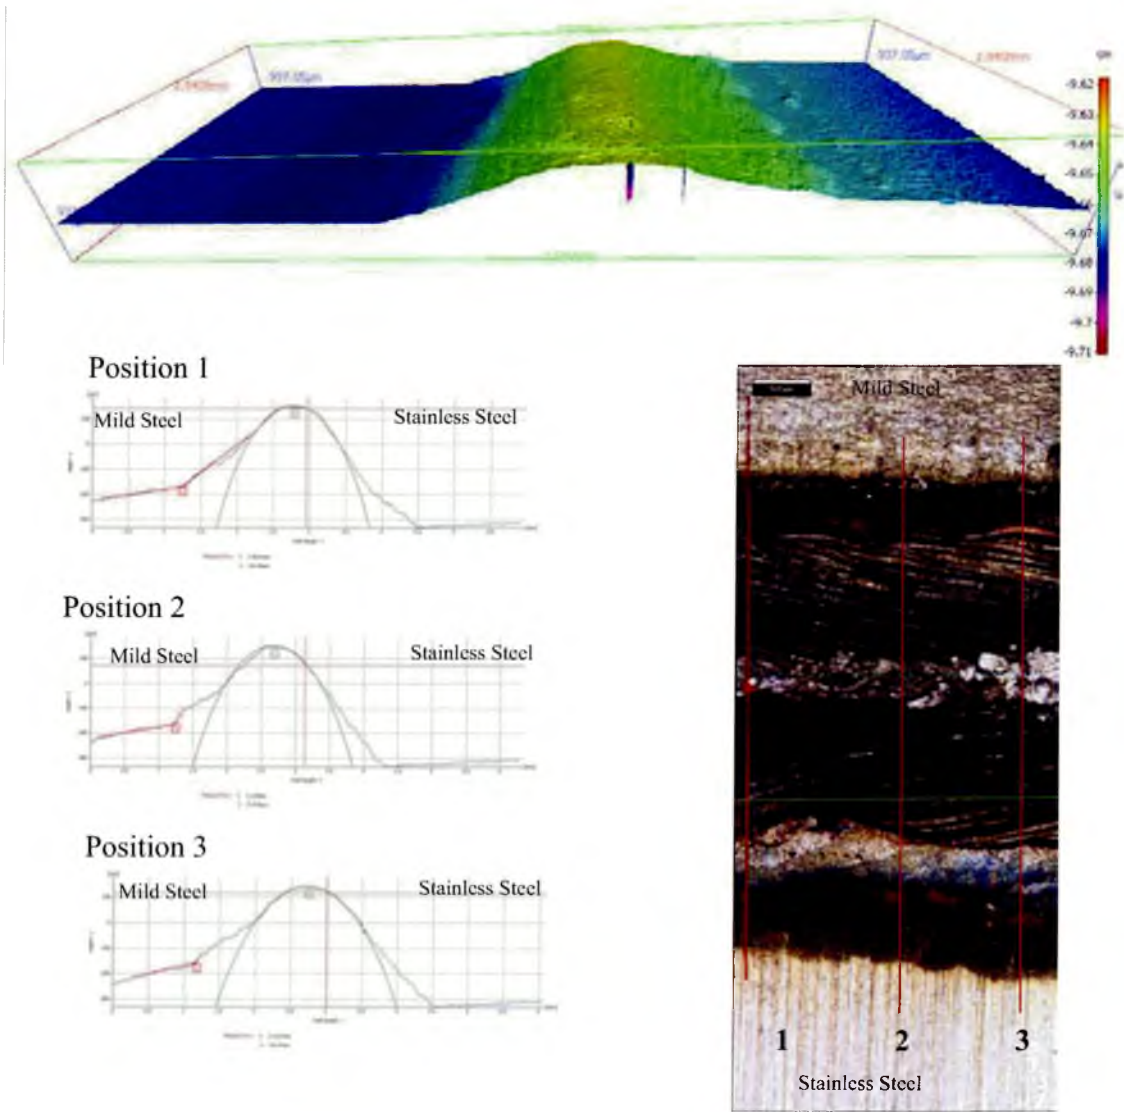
IFM 3D surface image and surface profiles for the front of the weld bead of sample F6.0.3
